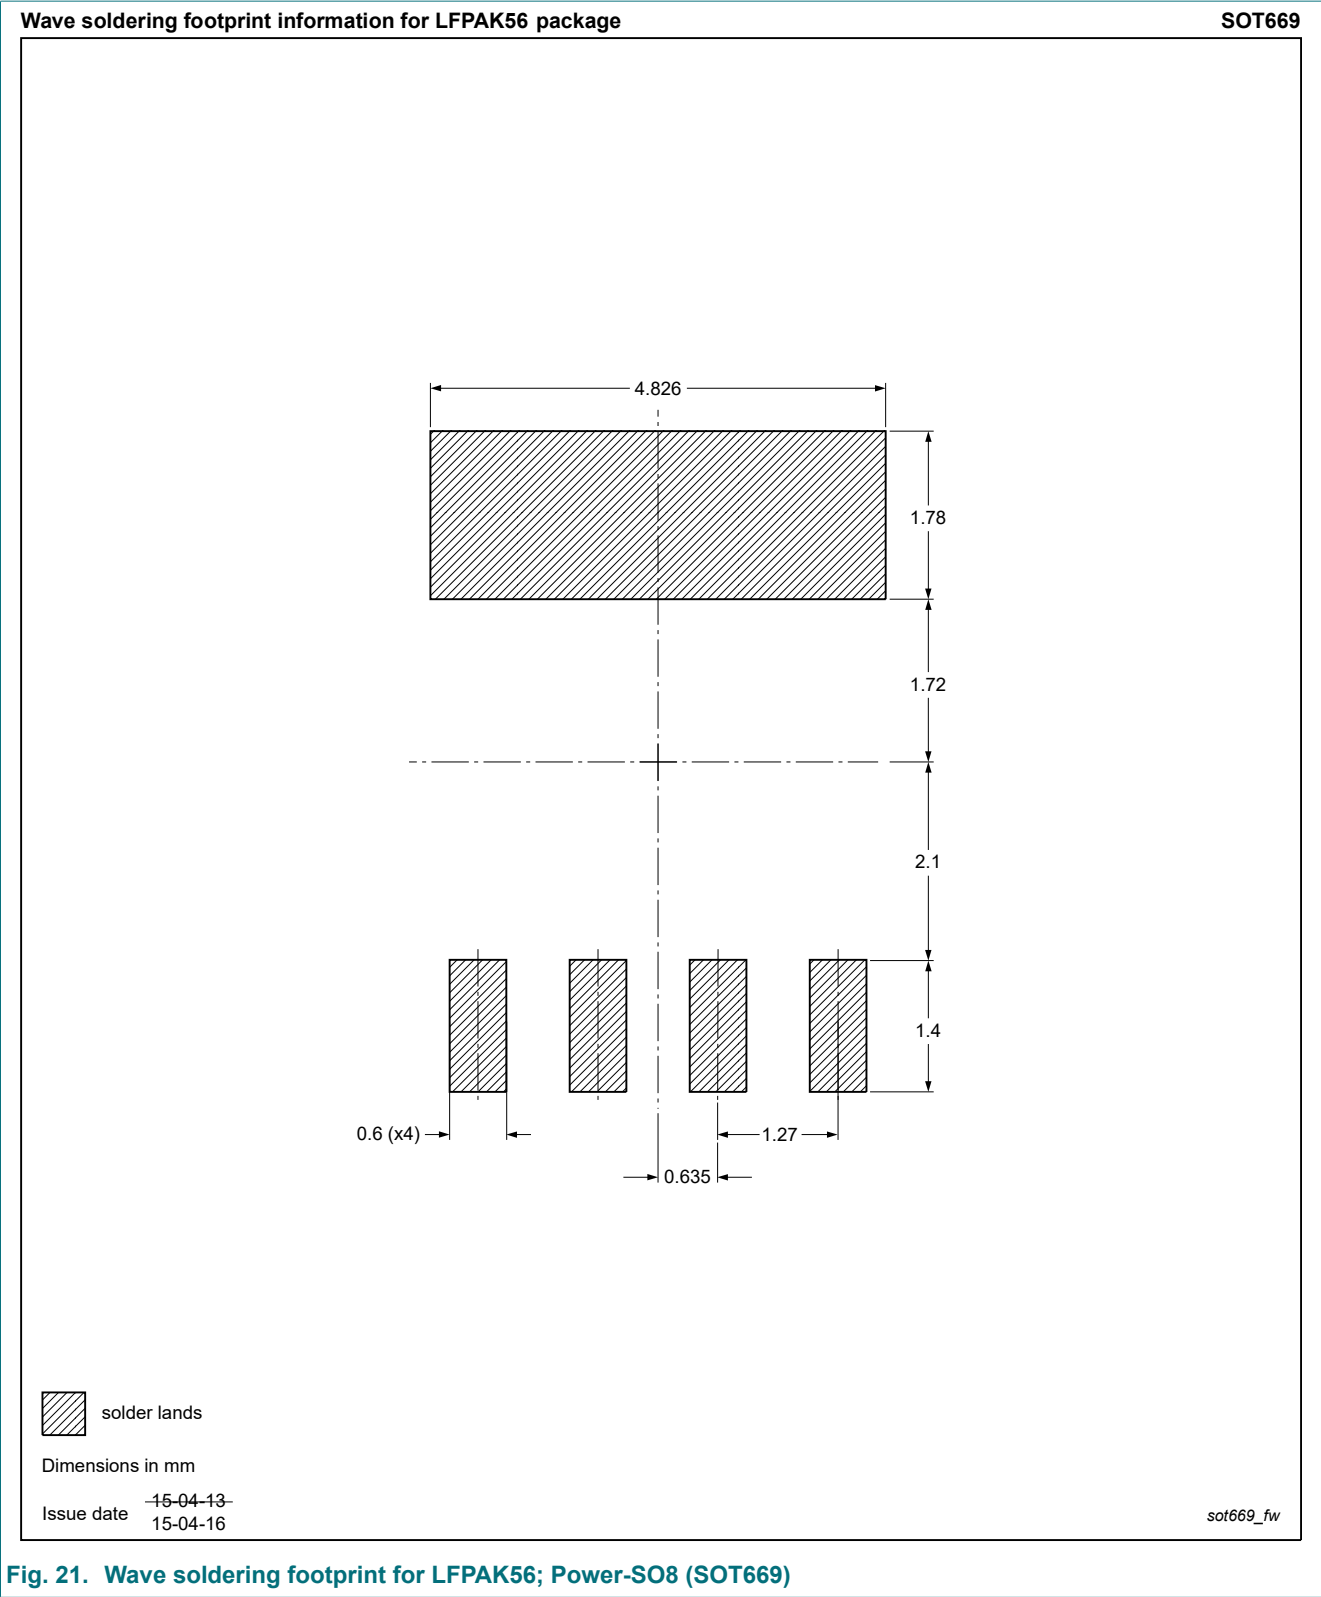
Wave soldering footprint for LPAK56; Power-SO8 (SOT669)
